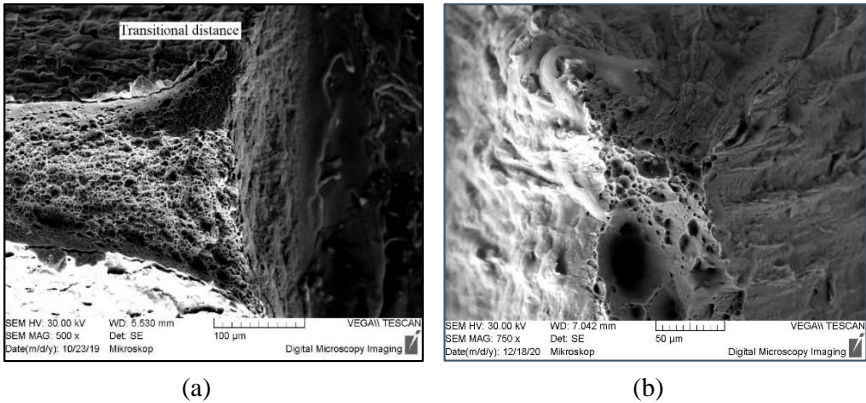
Fractured surface at the crack tip: (a) DP450 steel; (b) IF steel.
